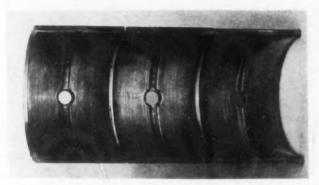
Bearing shells from engine equipped with an oil cooler after 500 hr of operation
